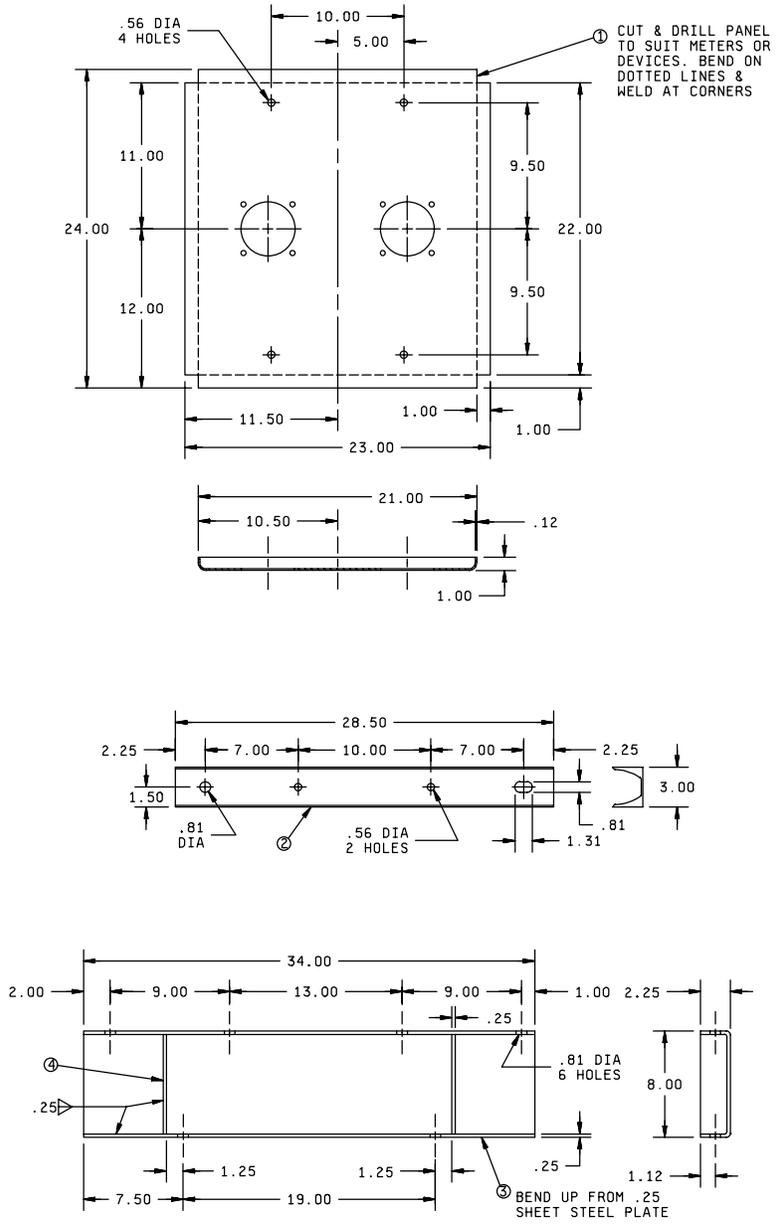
A. Standard mounting fixtures for electrical-indicating switchboard meters and other panel-mounted parts - Continued.
